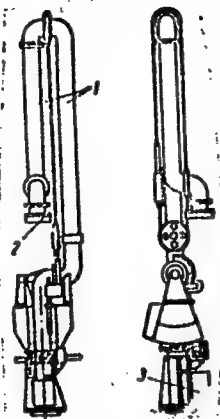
1 - swivel-connected pipes; 2 - attachment device; 3 - emergency disconnect unit.
